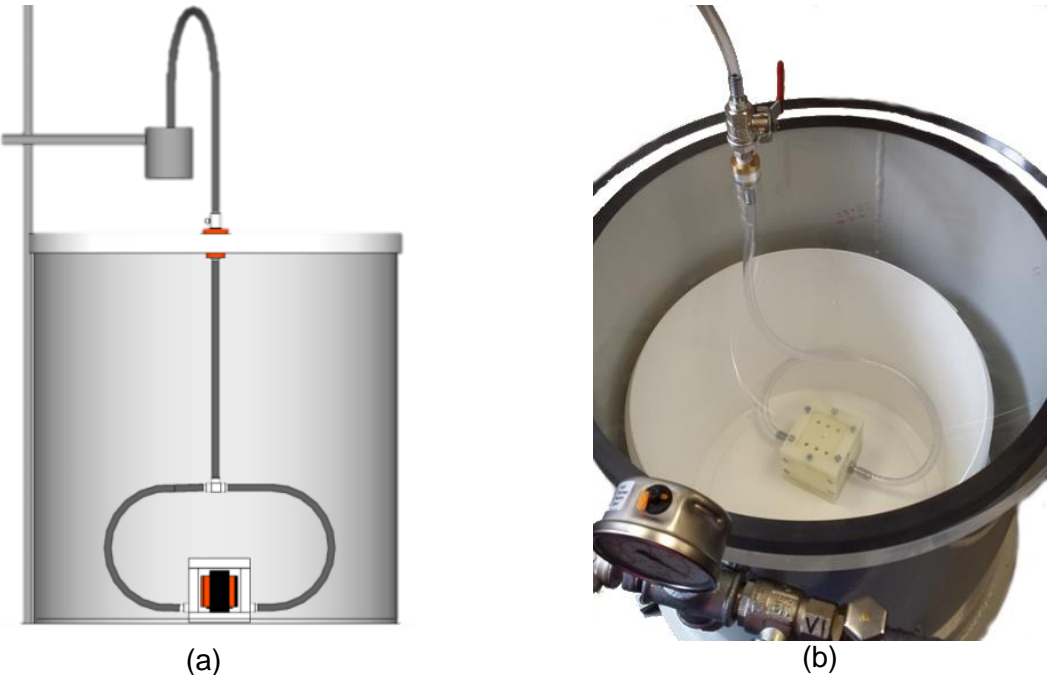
Vacuum potting chamber used for component encapsulated: (a) – side cross-sectional view; (b) – top view of chamber
